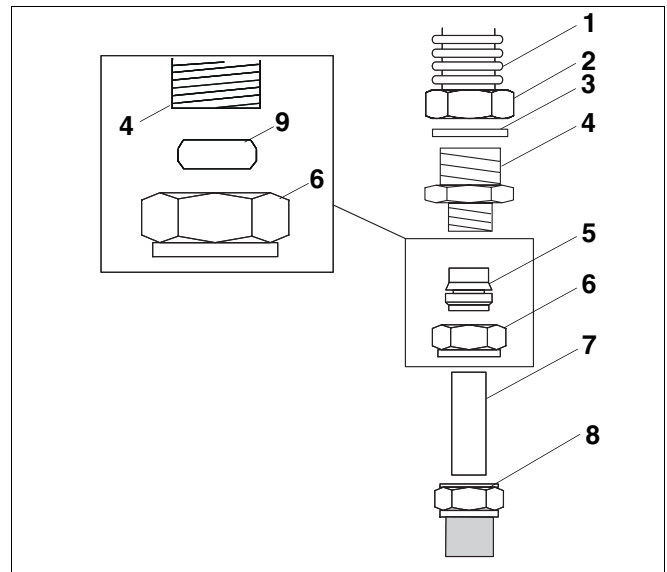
Twin Tube DN 20 connection to 18 mm compression fitting
